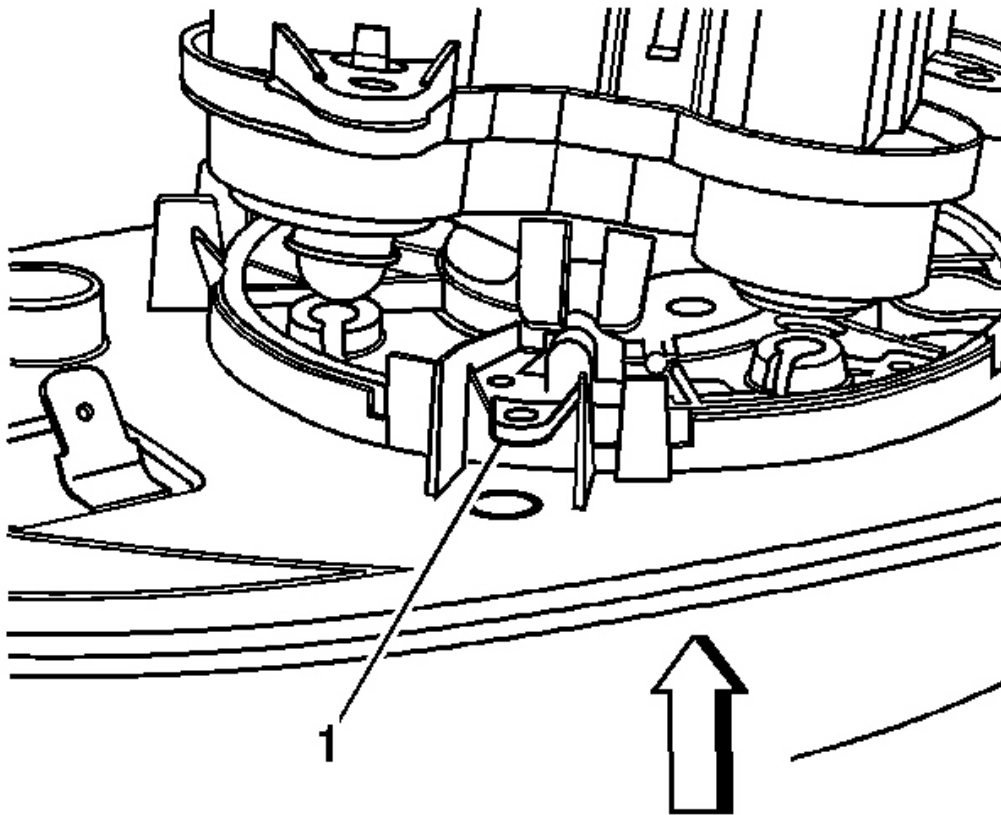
Identifying Glass To Actuator Upper Retaining Tab
